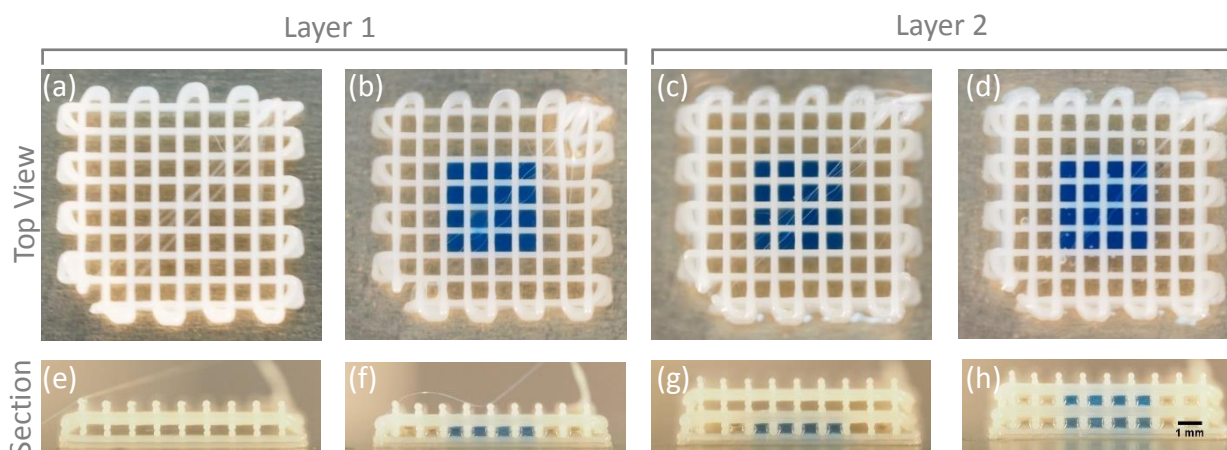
Top-view and cross sectional-view photographs of the steps involved in the layer-by-layer printing and assembly of a microsphere assembled construct with the aid of the automated assembly system. Contains 32 microspheres, arranged in 2 layers with 16 microspheres in each layer. *Scale bar = 1 mm for all images.
